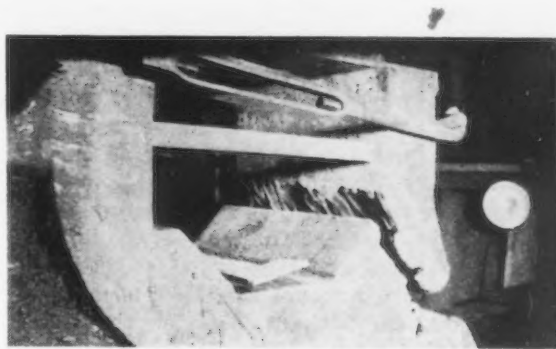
A side view of the broken pedestal shows the turnbuckles for aligning the parts for brazing.
